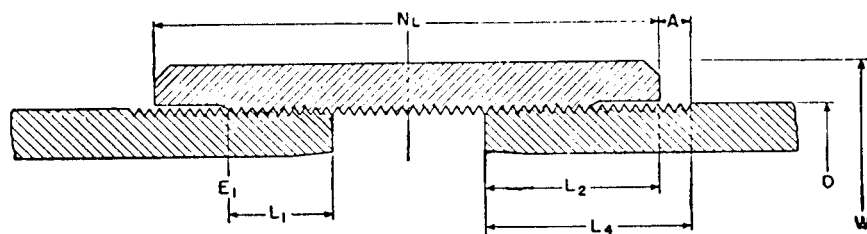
DIMENSIONS OF HAND TIGHT ASSEMBLY FOR USE WITH TABLE X3.2
